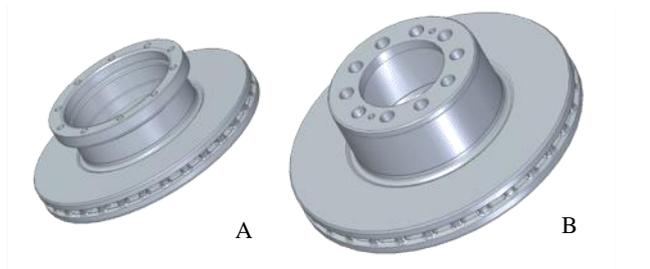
Brake disc designs available for commercial vehicles: A mounted at the outer flange; B conventional design with a “pot” hub
